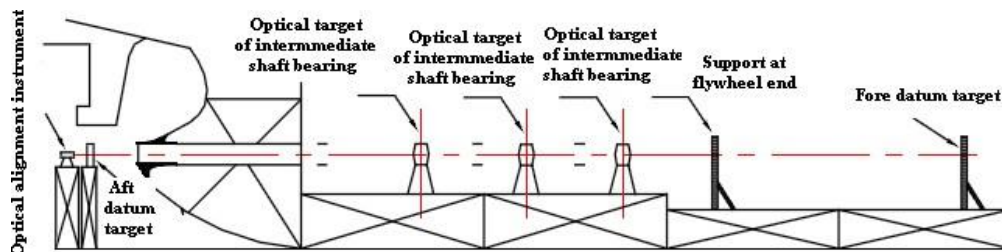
Reference Line of Shafting Determined by Optical Method
